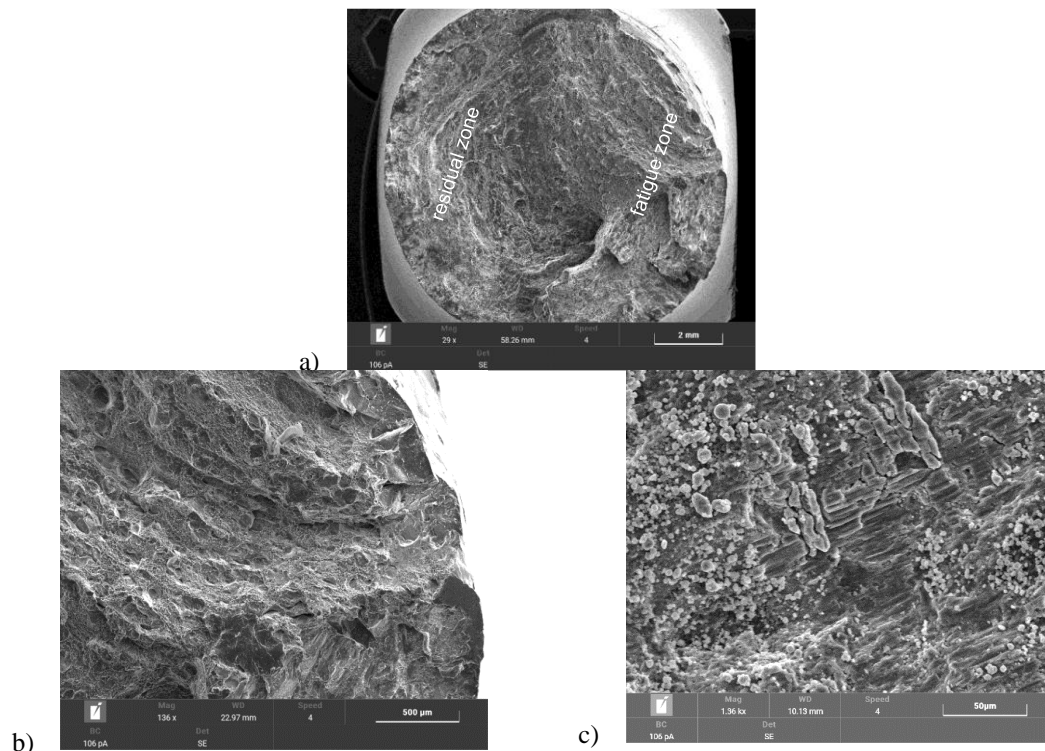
Fatigue fracture of the alloy after T6 treatment caused by torsion, fracture morphology, b) surface in the area of the fatigue zone, c) surface in the area of the residual zone (specimen 20 – 1 349 027 cycles).
